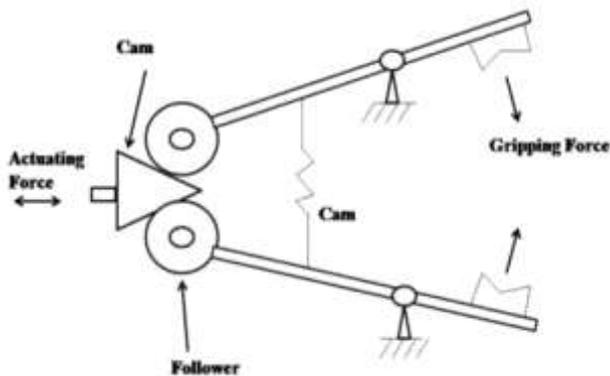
Two Jaw Cam Actuated Rotary Gripper
